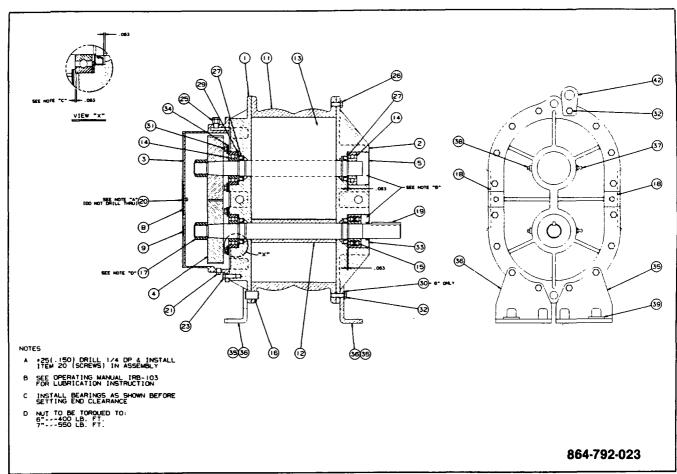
Assembly of UNIVERSAL RAI® Blowers, 6" and 7" Gear Diameter
